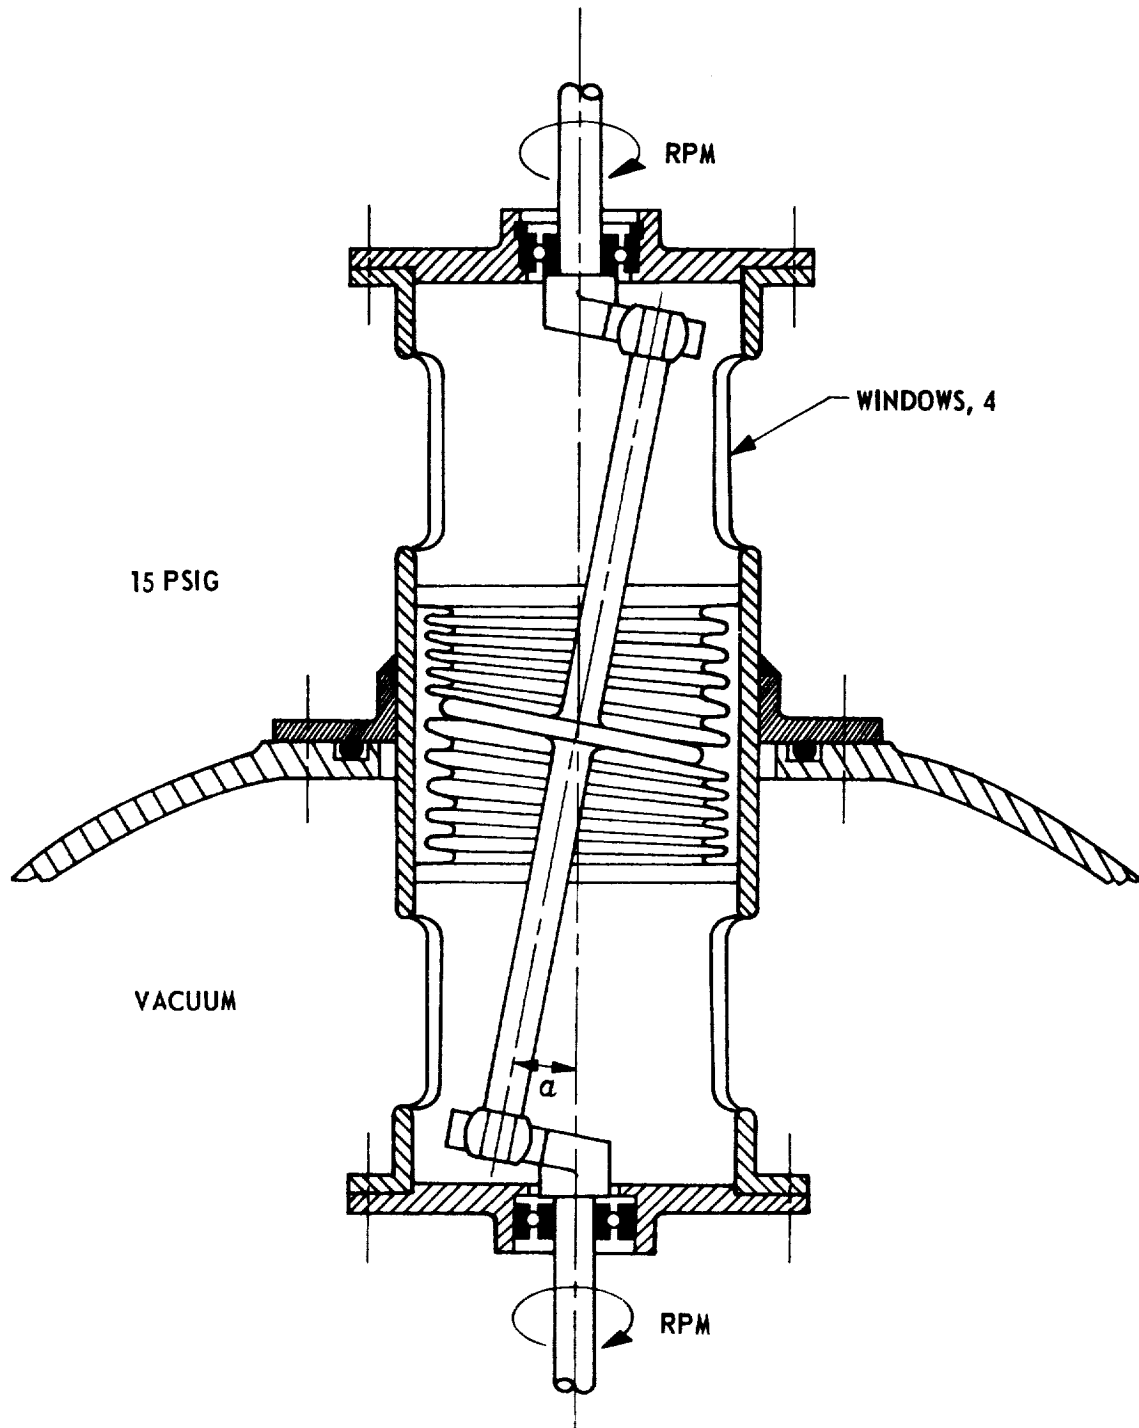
HERMETICALLY SEALED MECHANICAL TORQUE TRANSMITTER
